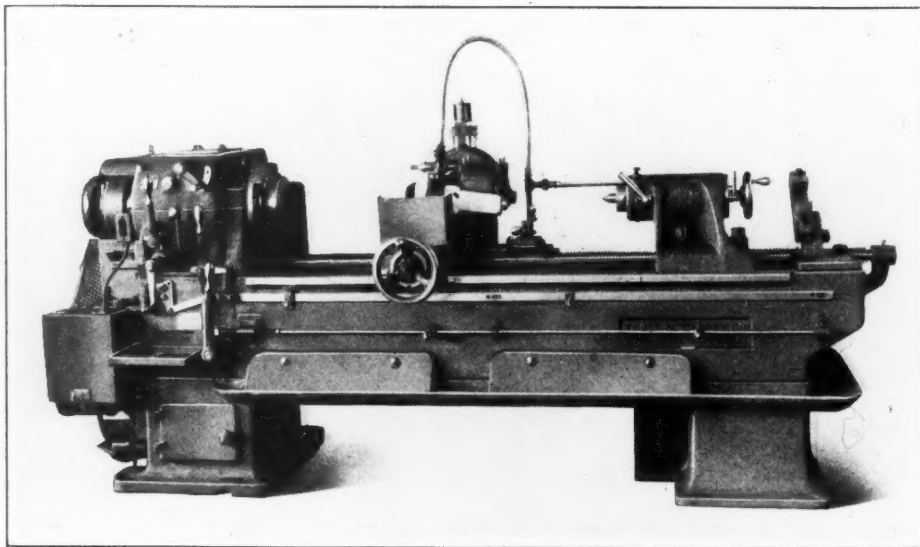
Pratt & Whitney Thread Miller of Improved Design
